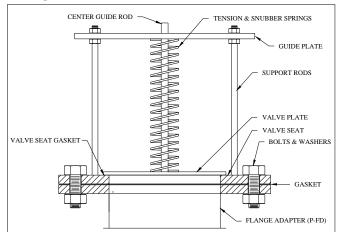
Excessive Pressure Relief Valve (P-ER)
